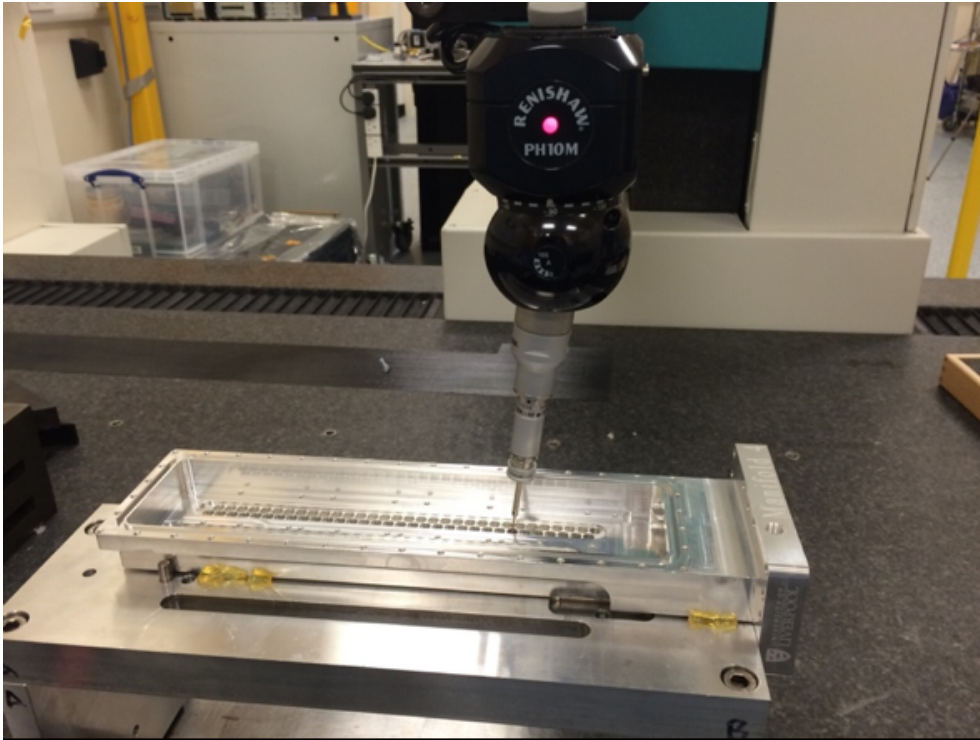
Picture of a CMM measurement of the manifold straw holes.
